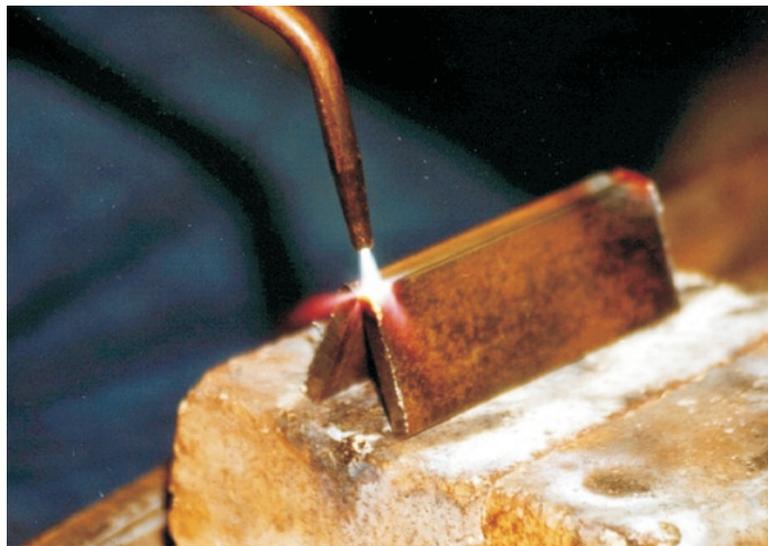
Forming a V in preparation of fuel gas welding.
